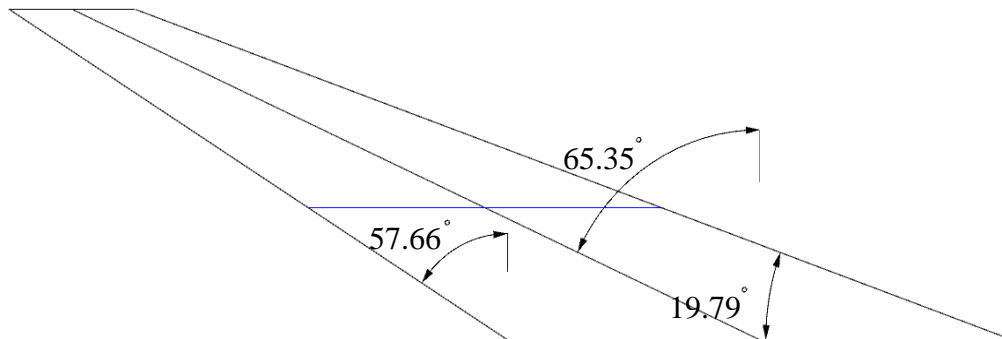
Swept Back Angles for Cambered Planing Surface, Plan View
